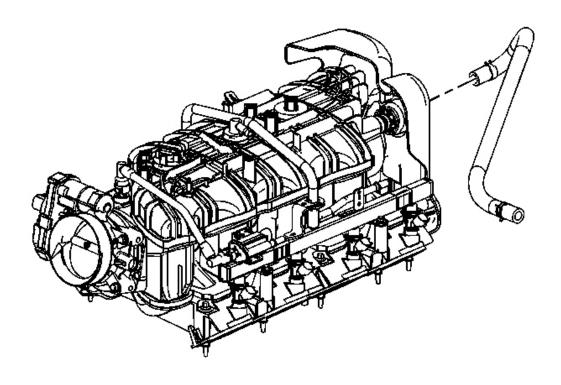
Vacuum Brake Booster Hose Courtesy of GENERAL MOTORS CORP.
